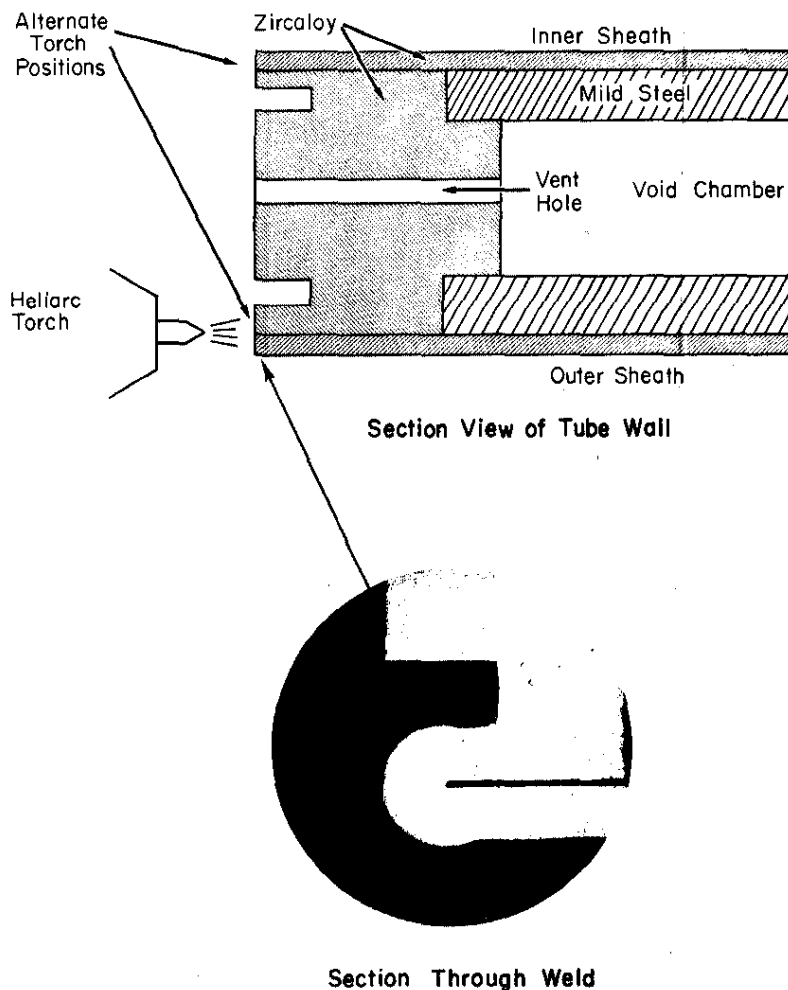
WELD DESIGN AND TYPICAL WELDMENT FOR UO_2 TUBES
